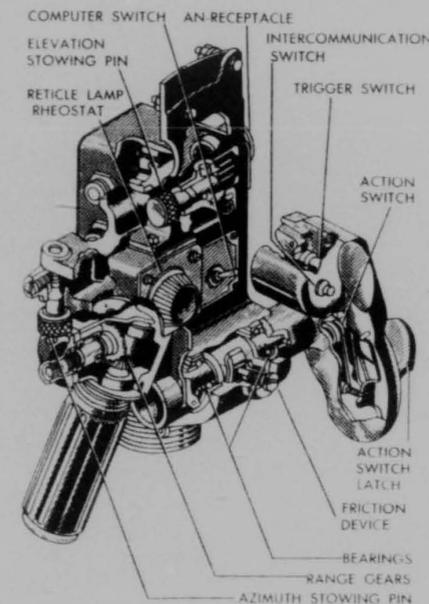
Cutaway View of Control and Junction Box Assembly Showing Shaft Bearings, Friction Device and Range Adjustment Gearing.
